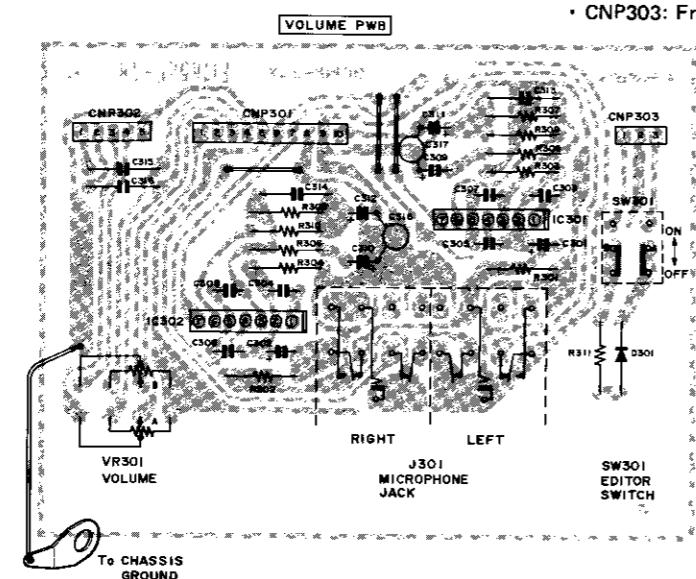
WIRING SIDE OF PRINTED WIRING BOARD (3/4)
